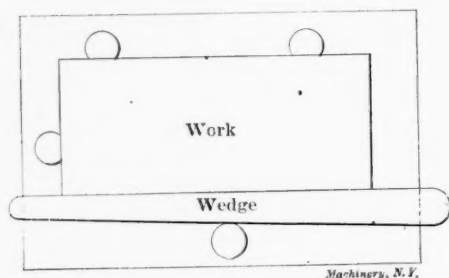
Wedge Acting as Clamp in Drill Jig.
